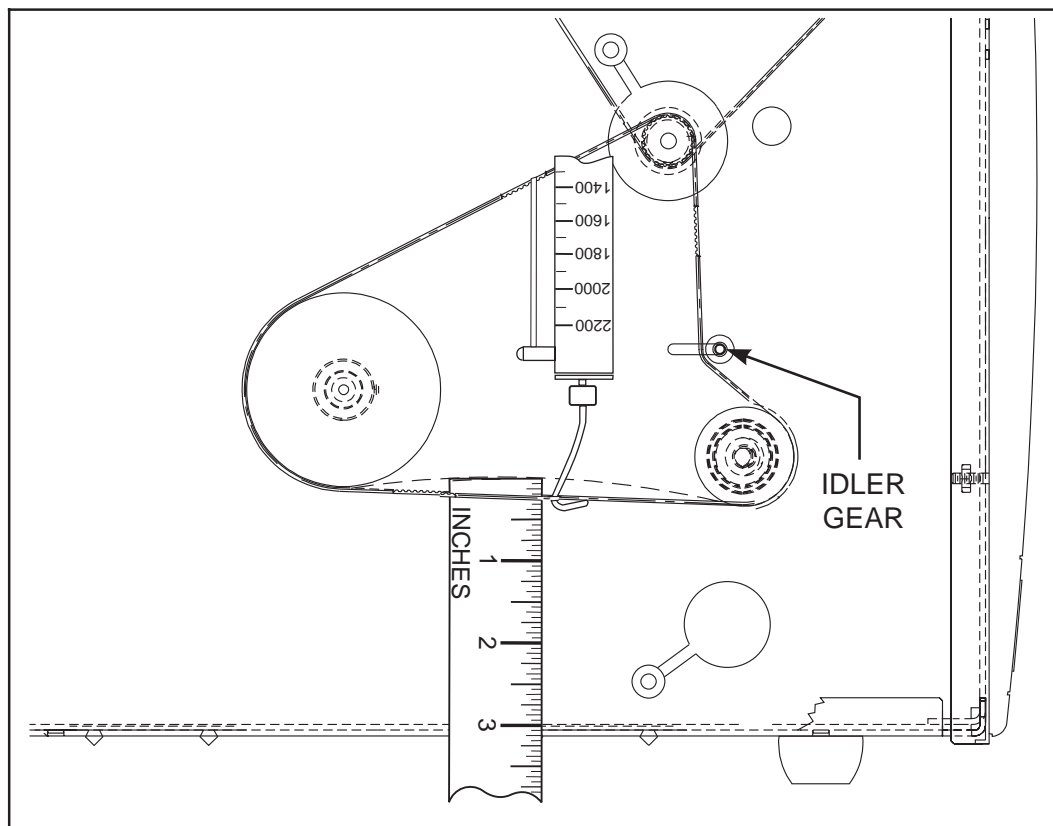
90/140/170/220XiII Rewind Drive Belt
